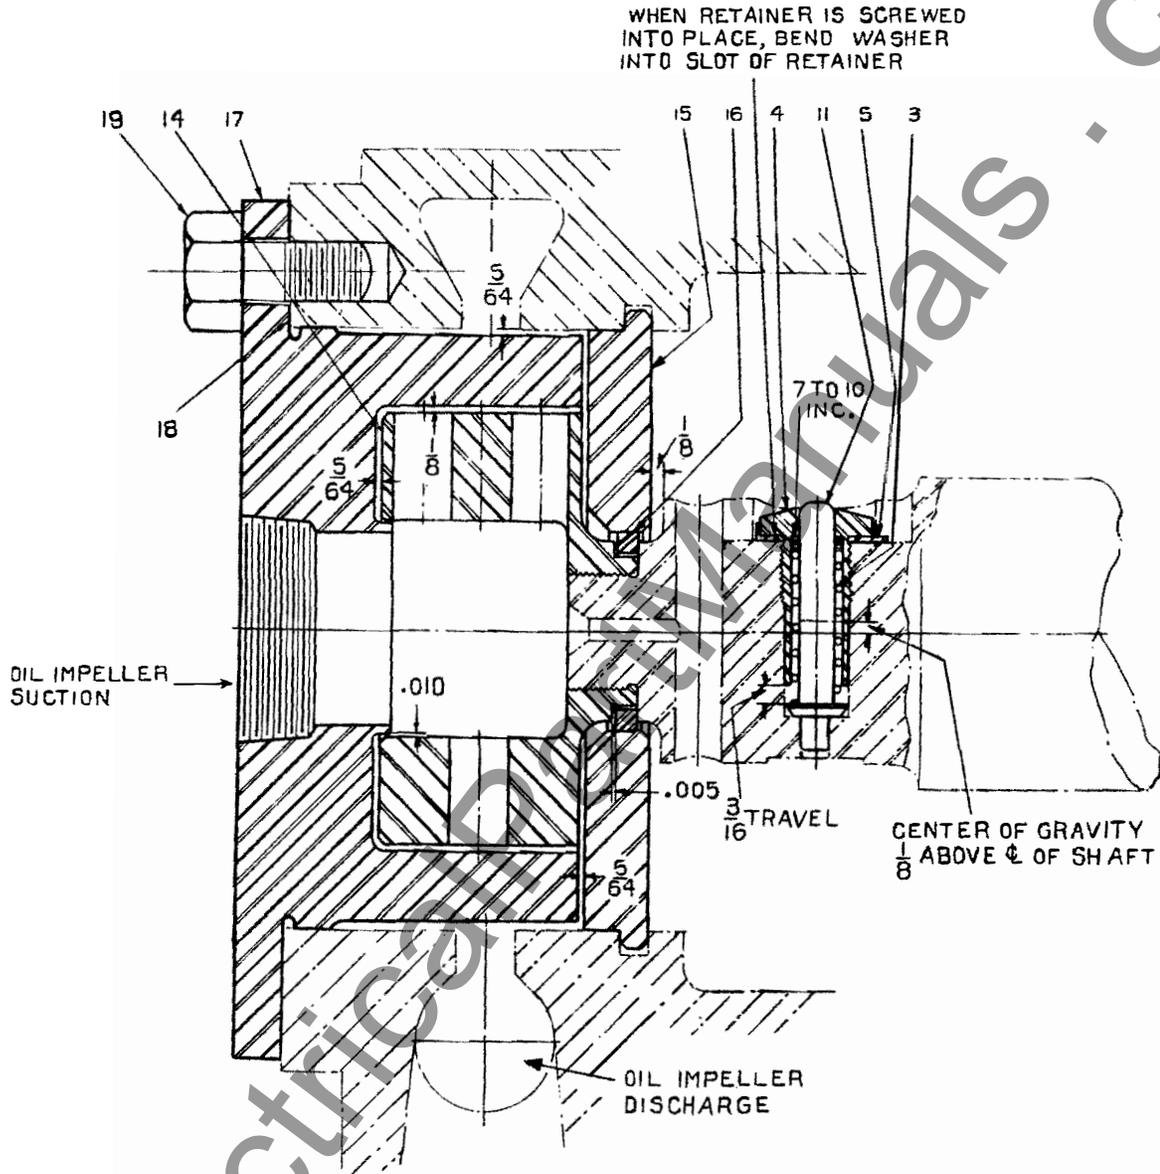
OIL IMPELLER AND AUTOMATIC STOP GOVERNOR
